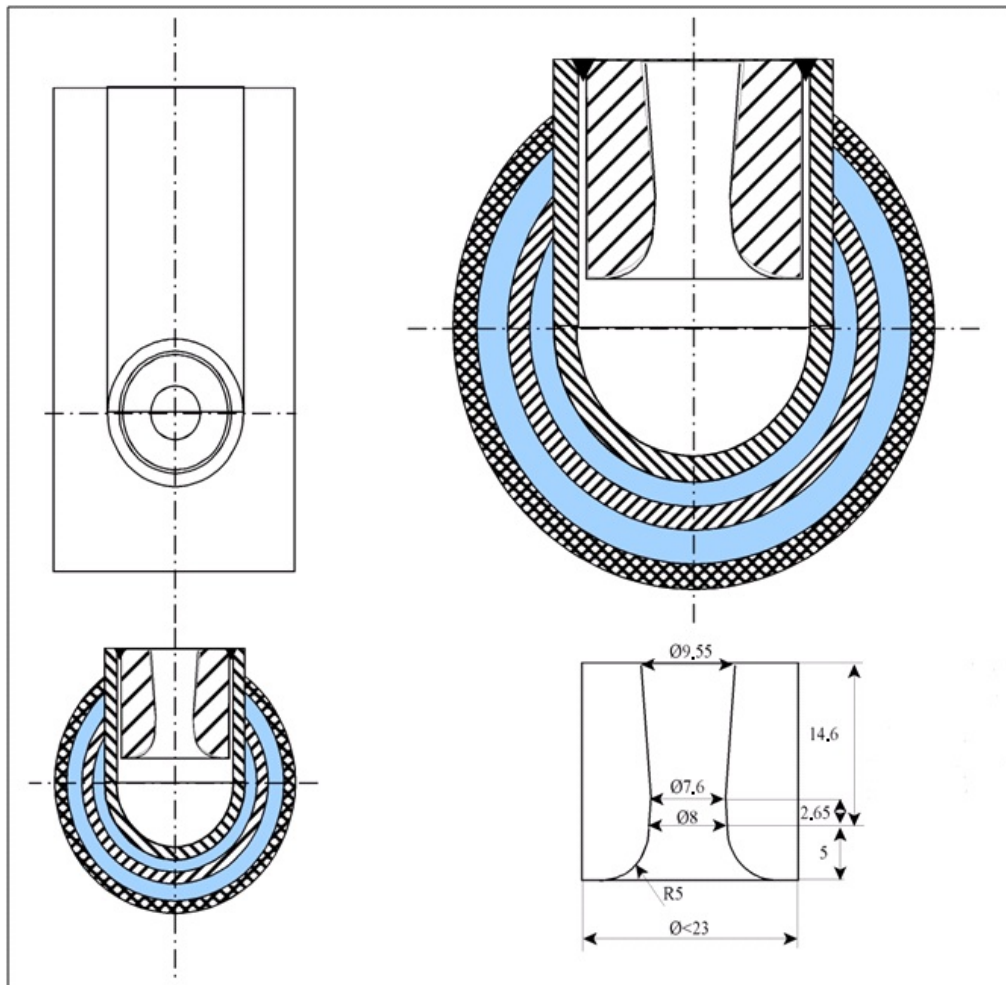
Detailed drawings of the sooblowing nozzle.
